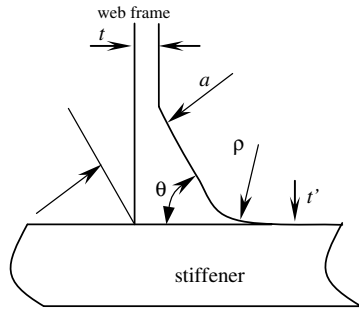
Weld profile between the web frame and the stiffener,  $t = 6$  mm,  $t' = 3$  mm.
